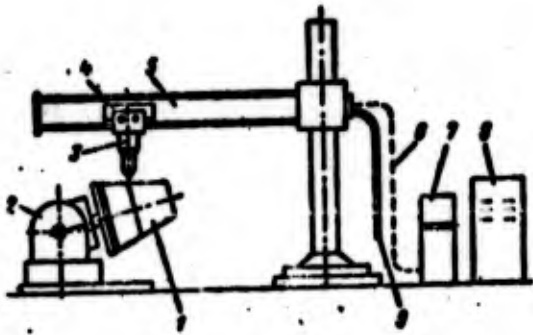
Welding apparatus: 1 - welded article; 2 - manipulator; 3 - welding head; 4 - hopper; 5 - cantilever; 6 - wire; 7 - control equipment; 8 - power supply; 9 - argon supply.
